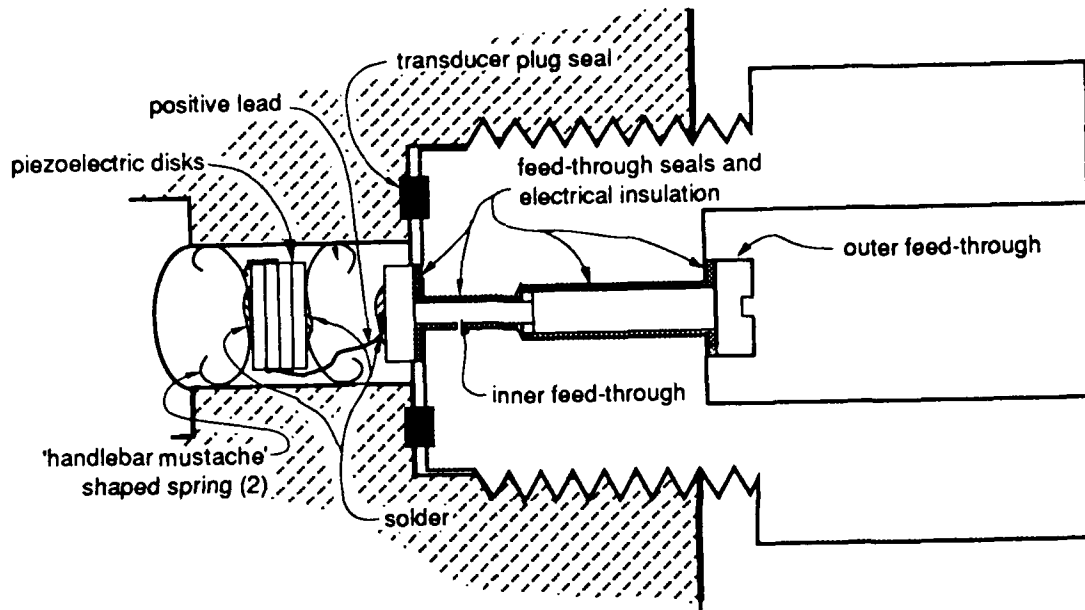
ENLARGED CROSS SECTIONAL VIEW OF SUGGESTED MOUNTING FOR STACKED TRANSDUCERS. SCALE IS 2:1. AS-89-1566
